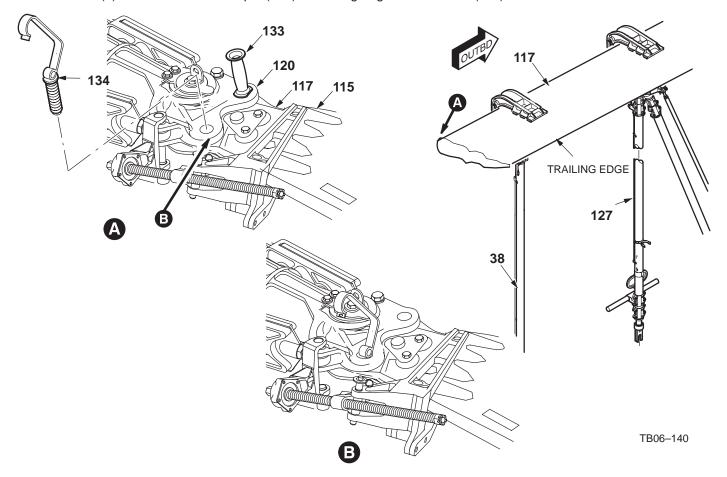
Install Identified Aircraft Blade Pin on Trailing Edge Side of Blade
